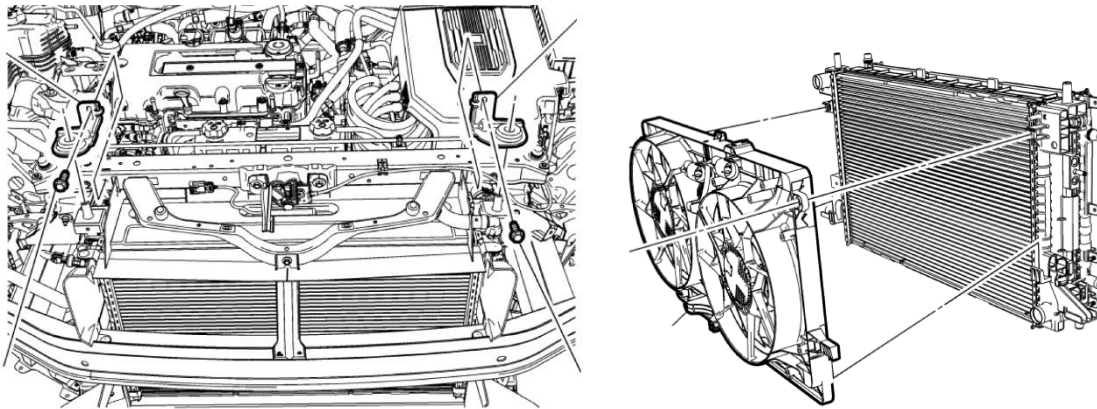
Chevrolet Volt Front-End and Radiator Assembly
